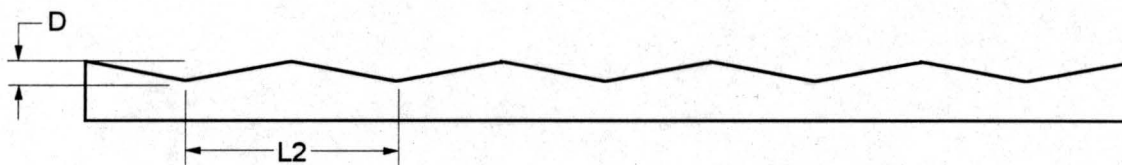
Side view of a Type 1 surface showing wave pattern into the face of the surface.
